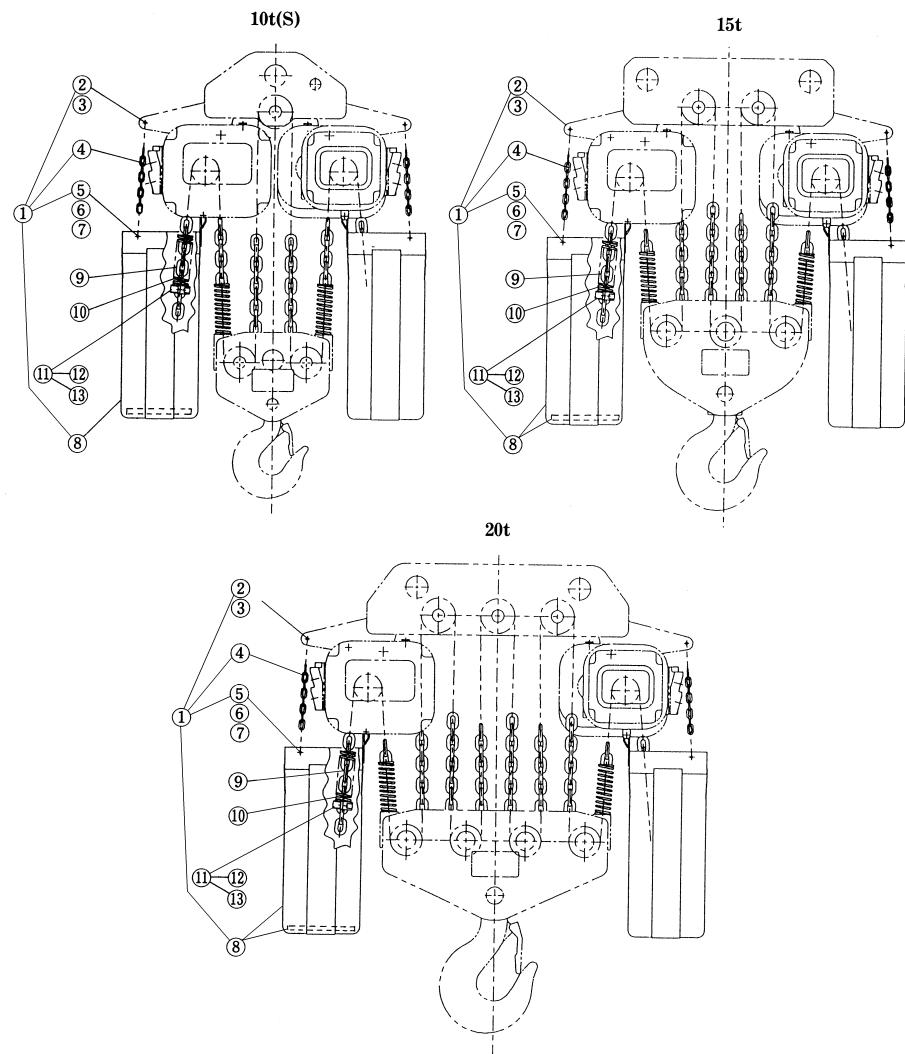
Chain Container Parts 10(S) & 20 Ton
